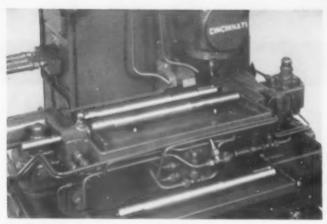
Fixture for automatically locating, clamping and ejecting the workpiece controlled by the machine cycle.
